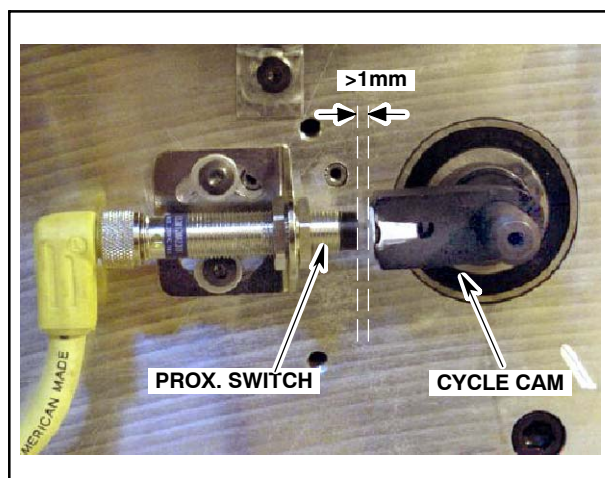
Adjust Proximity Switch to Less Than 1 mm From Machine Cycle Cam
